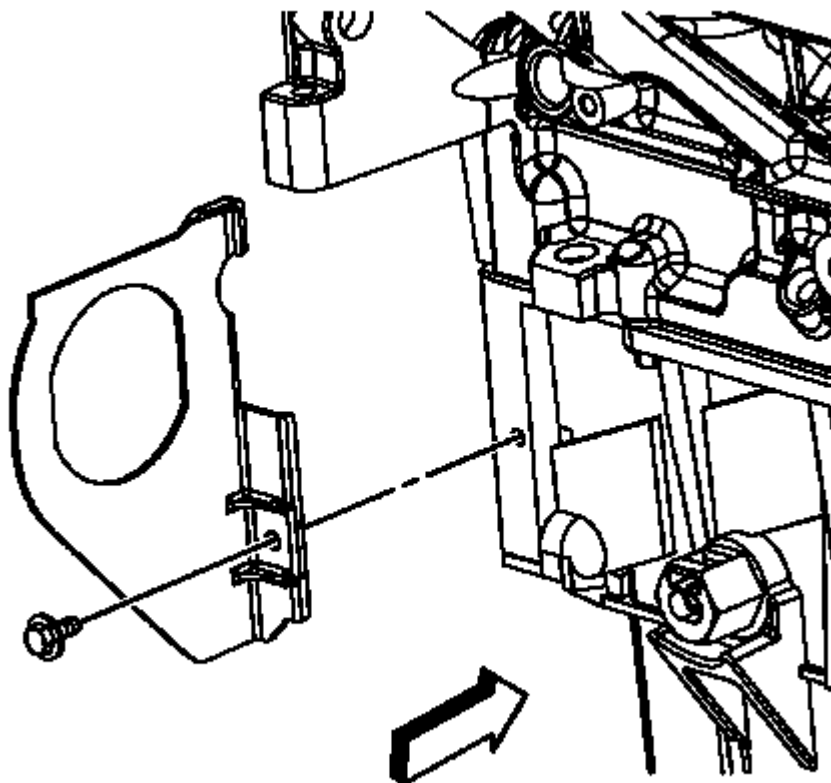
View Of Vehicle Crossbar, Bolts & Nuts
